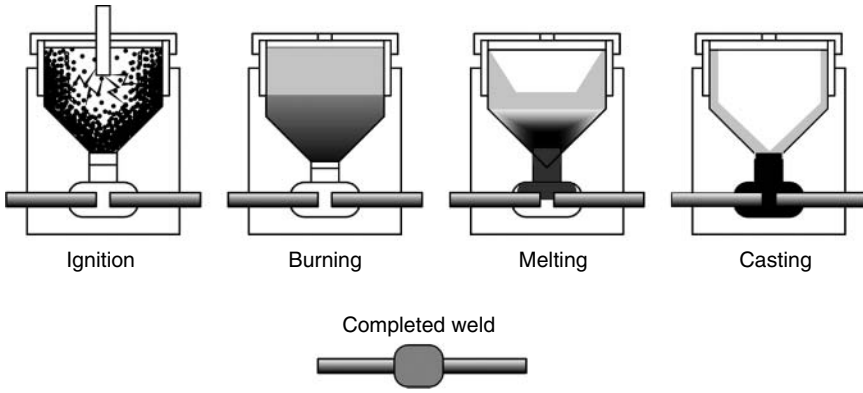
Typical crucible-mould set-up for thermite welding of copper conductors.
